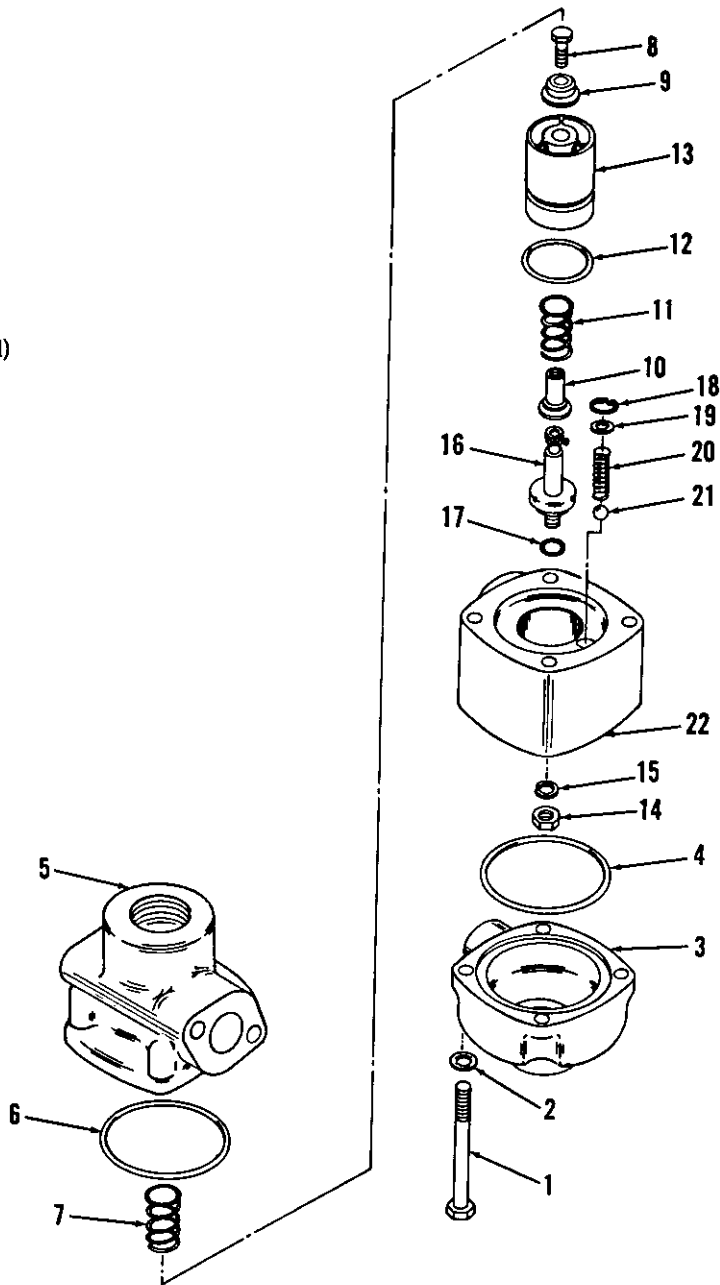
Thermal Bypass Valve Assembly, Disassembly and Reassembly
